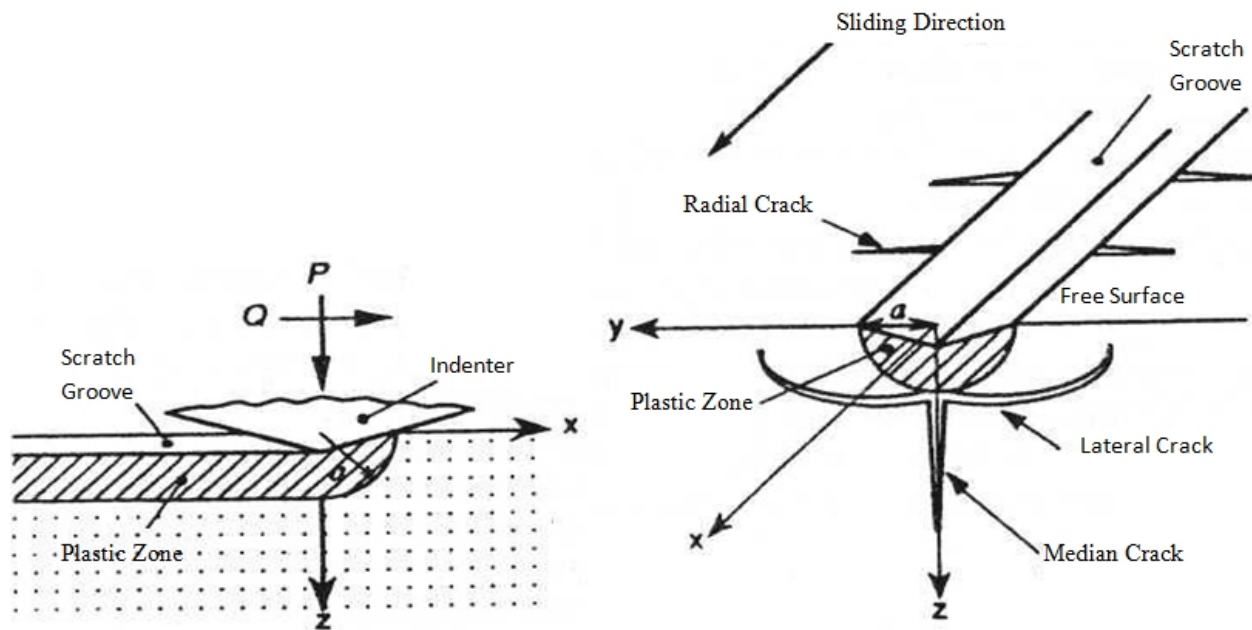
Slipping of grinding indenter on brittle surface and schematic demonstration of fracture after the process
